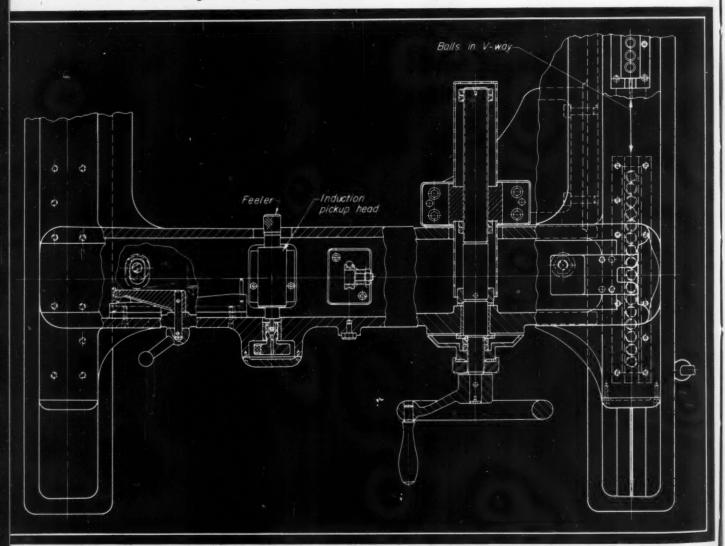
Section through work table carriage showing balls on which table rides and feeler which senses changes in center distance of gear and master worm section ance limits a low tape speed is desirable so that runout is clearly separated from tooth to tooth flicker. For close analysis of individual tooth errors, the faster tape speeds are helpful.
